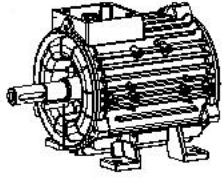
The feet on foot-mounted motors are cast integrally with the motor casing
